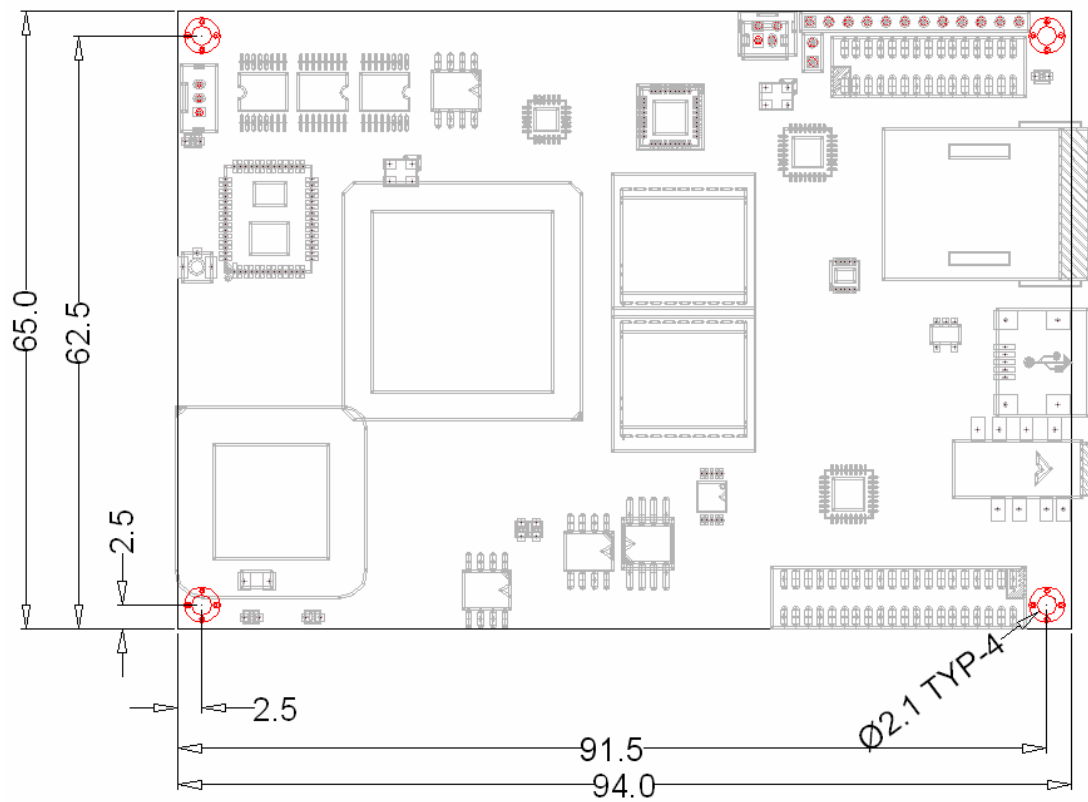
EX-9162M51A PCB Dimension and Profile
